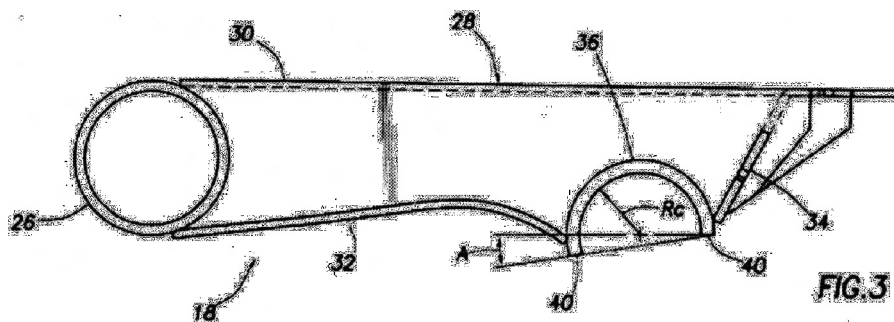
depicts the pivot arm assembly 18 having a bushing tube 26, a pivot arm 28, a rear support plate 34, and an axle connector 36 for attaching to the axle (col. 2, ll. 47-49).
